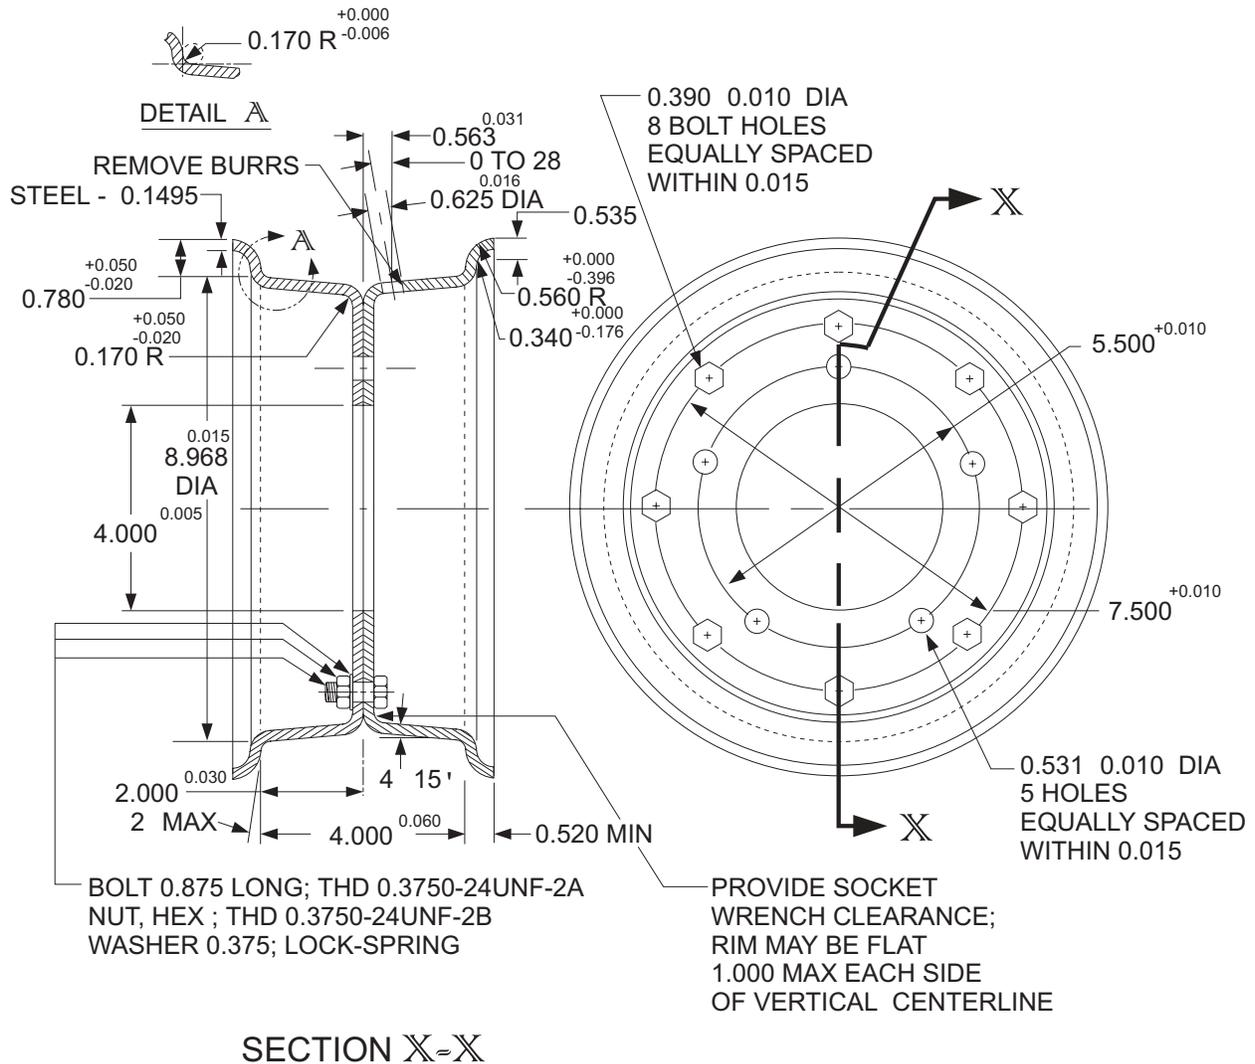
Wheel, pneumatic tire, 3.50-6
